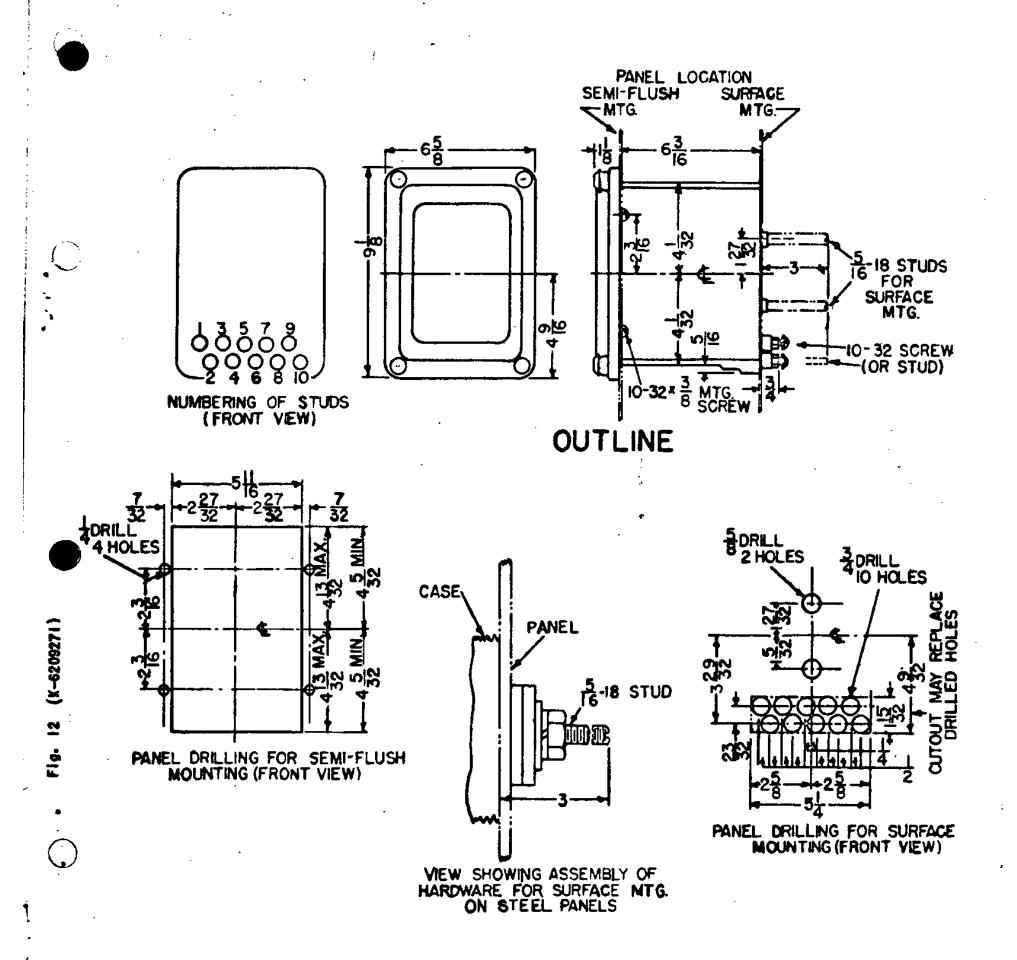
Outline And Panel Drilling Dimensions For Type IJF Relays
